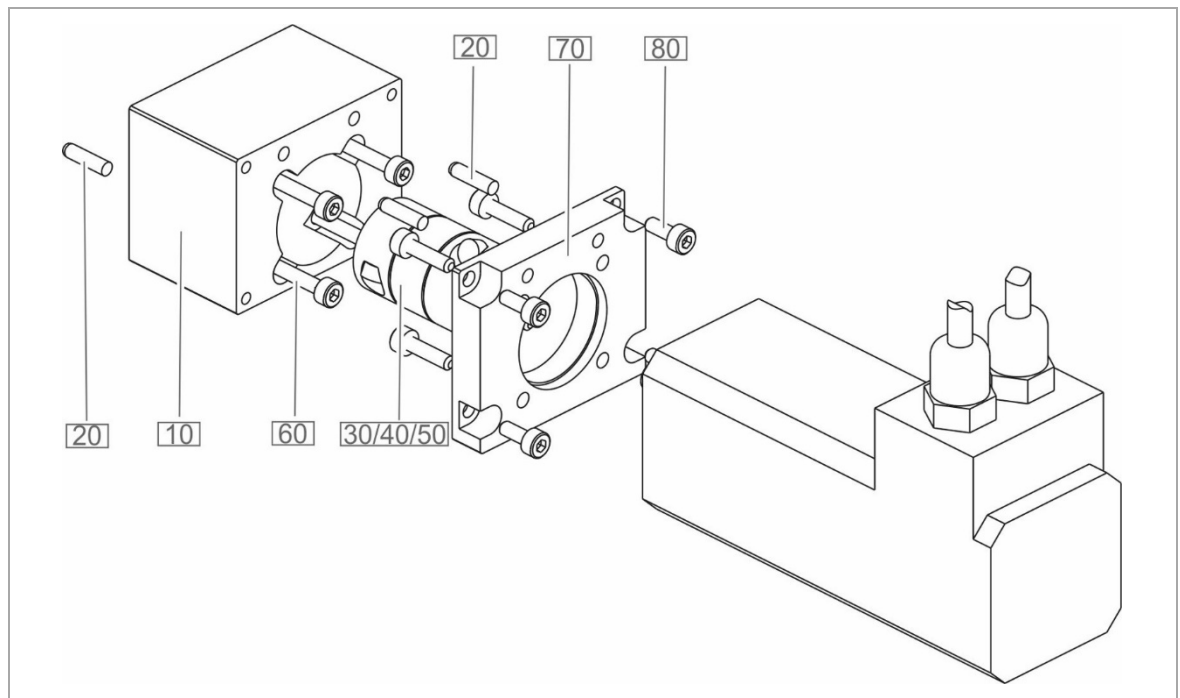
Flange for axial motor attachment, bolt circle 40, exploded illustration
